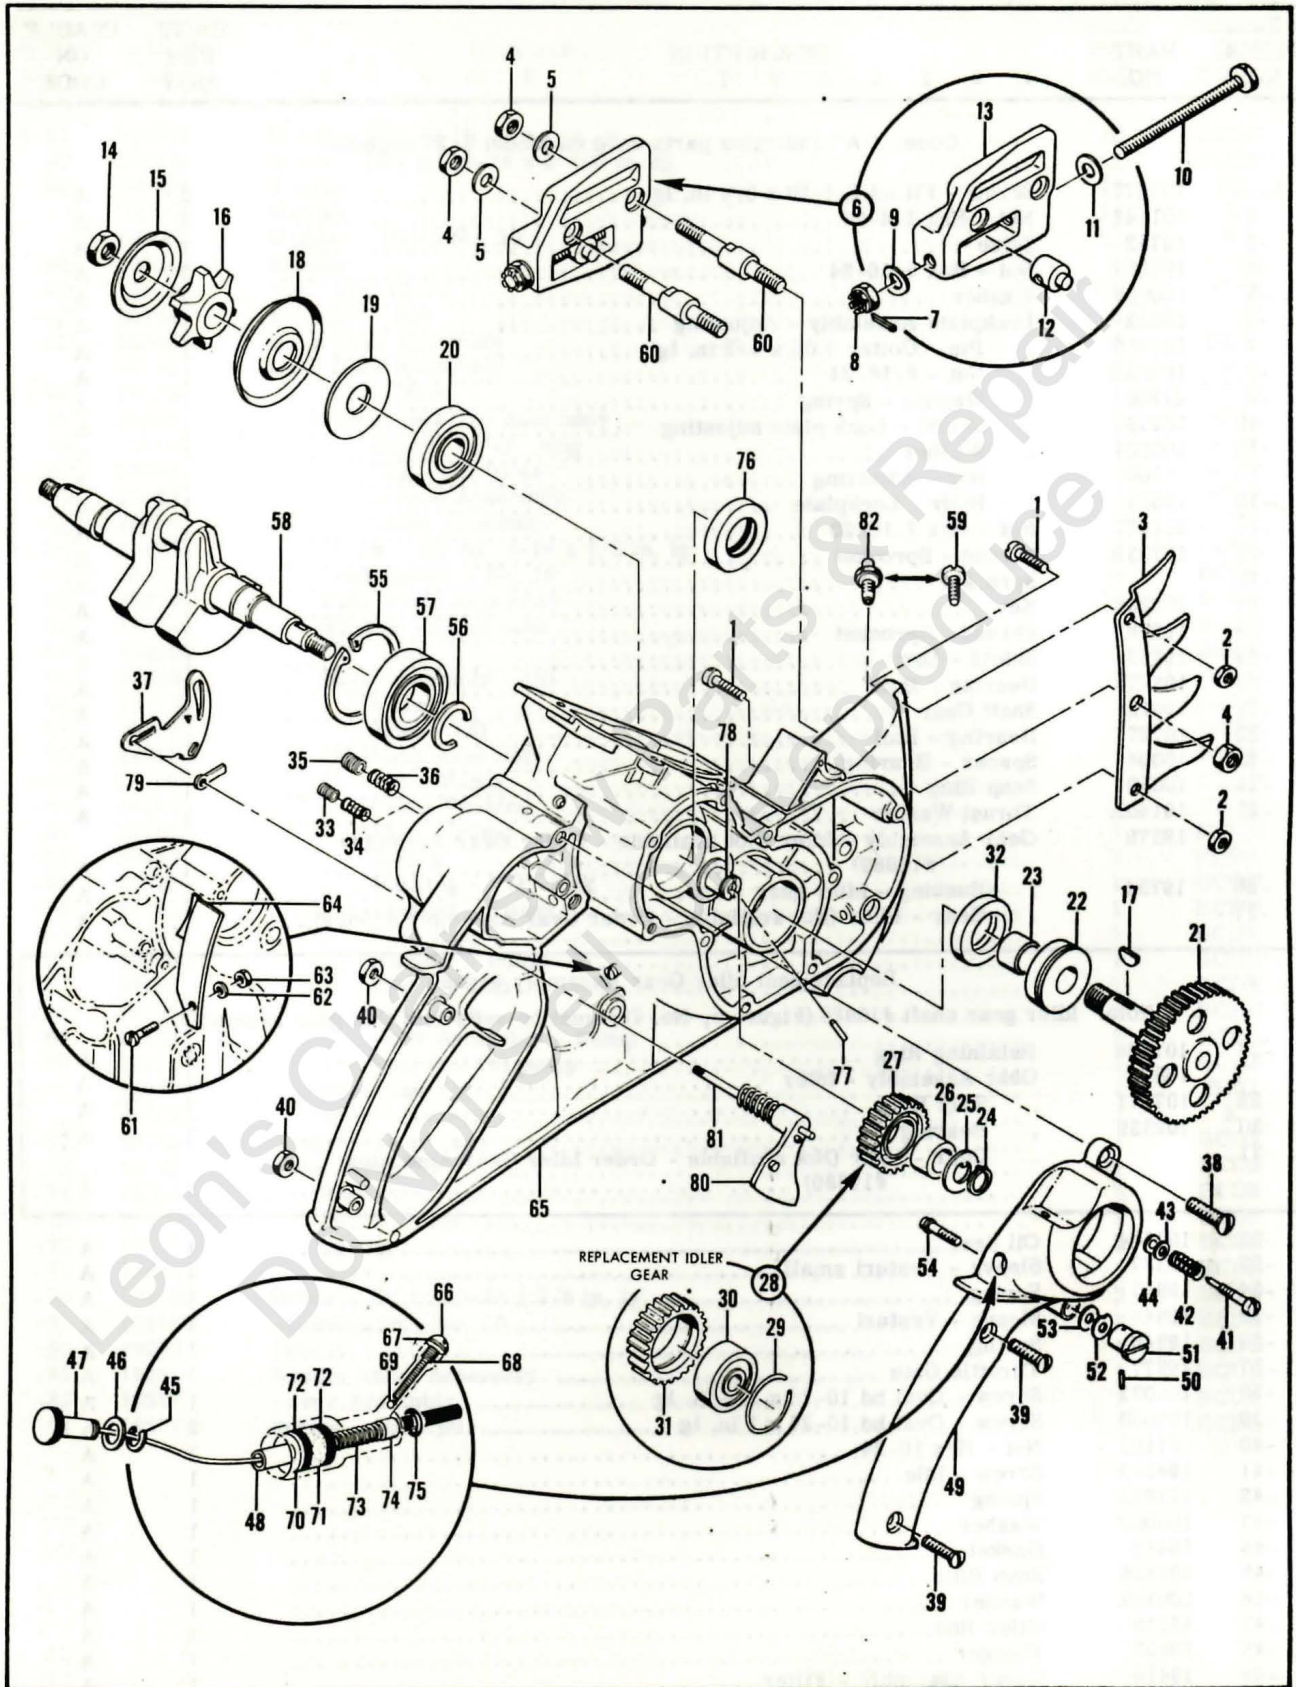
Crankcase and Bar Adjusting Lockplate, (Model 3-25 Engine Only)
